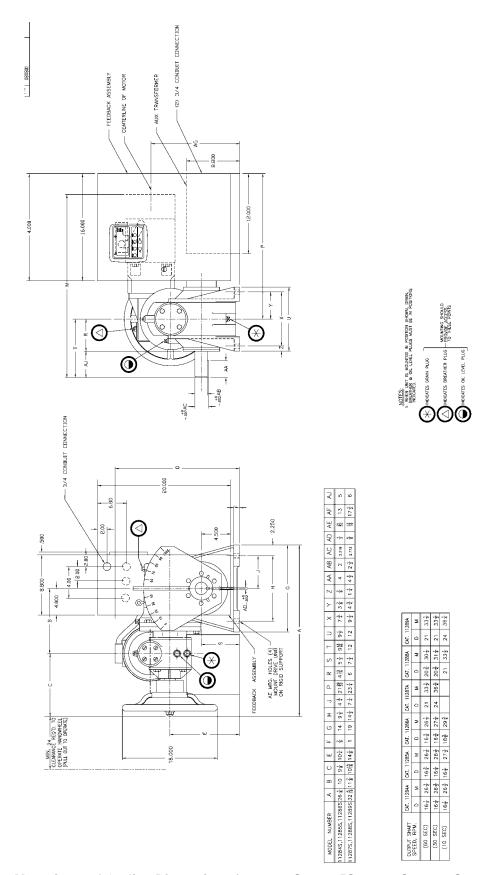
Mounting and Outline Dimensions for 11284S, 11285S, 11286S, 11288S, and 11289S
